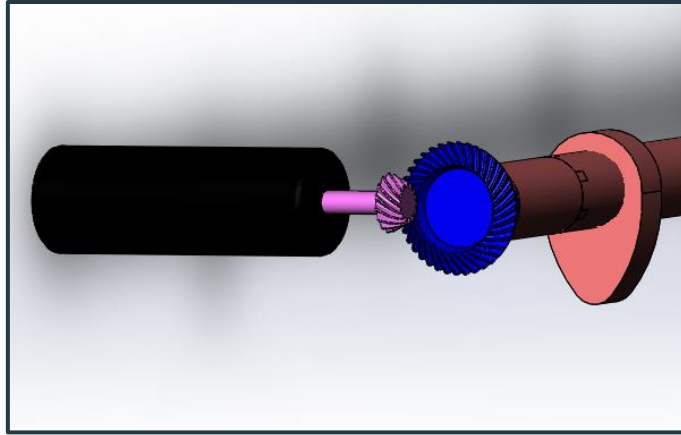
Close up of Motor(Black) Connected to Pinion(Pink) + Bevel Gear(Blue) Assembly Driving the Camshaft(Orange)
